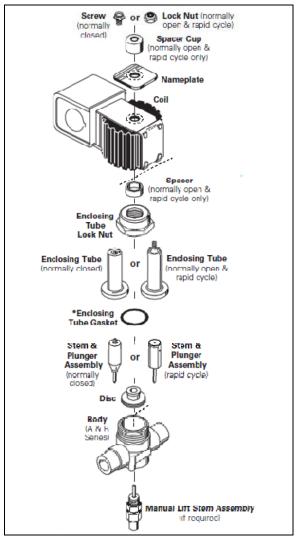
TYPICAL REFRIGERANT SOLENOID VALVE 22044
